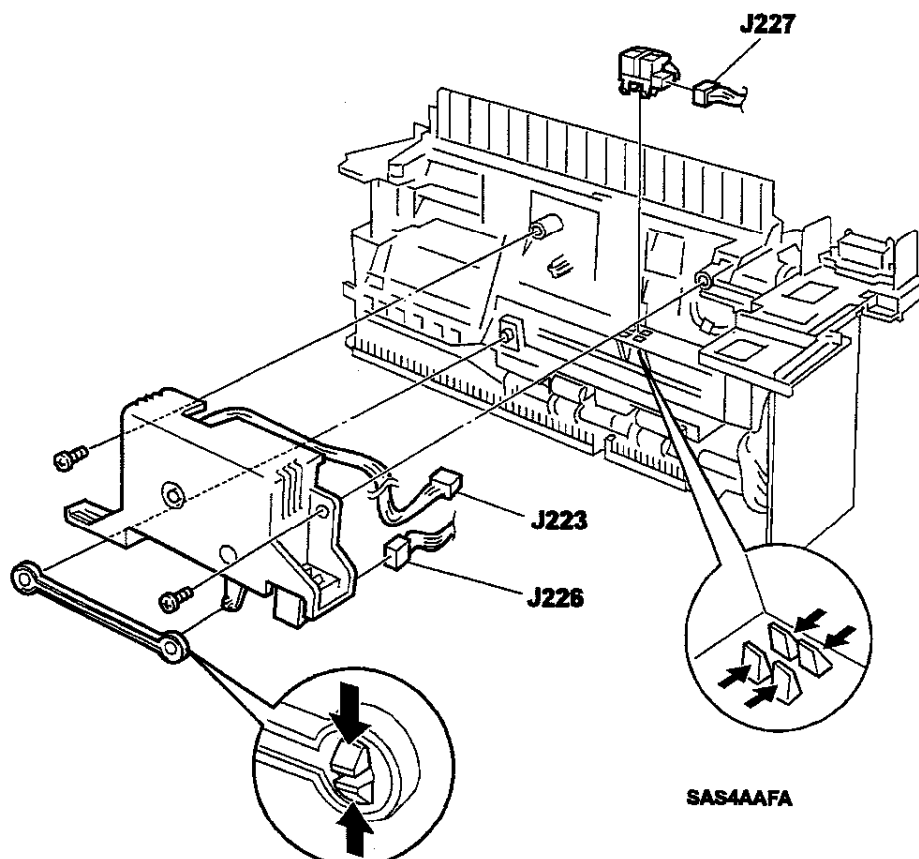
Removing the Offset Assembly/Exit Sensor Assembly
